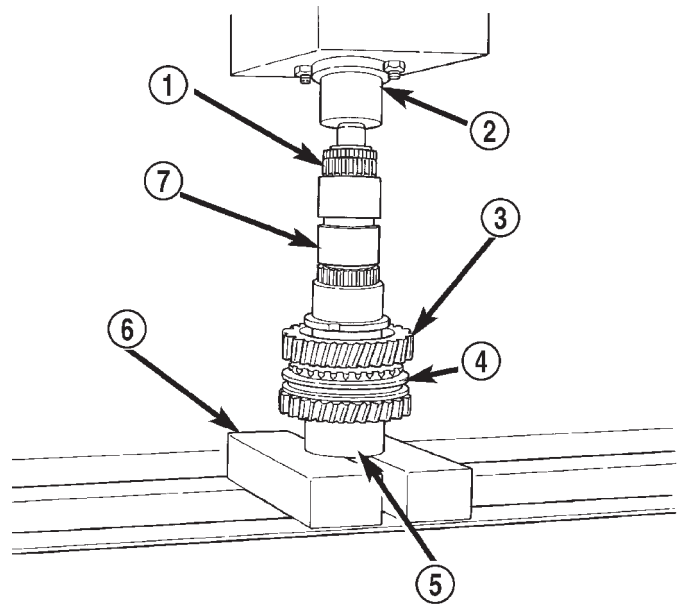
FIFTH-REVERSE SYNCHRO ASSEMBLY
